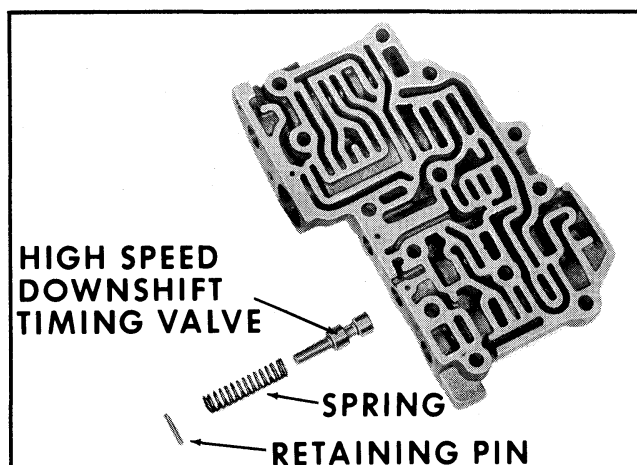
B-46 High Speed Downshift Timing Valve - Exploded View
